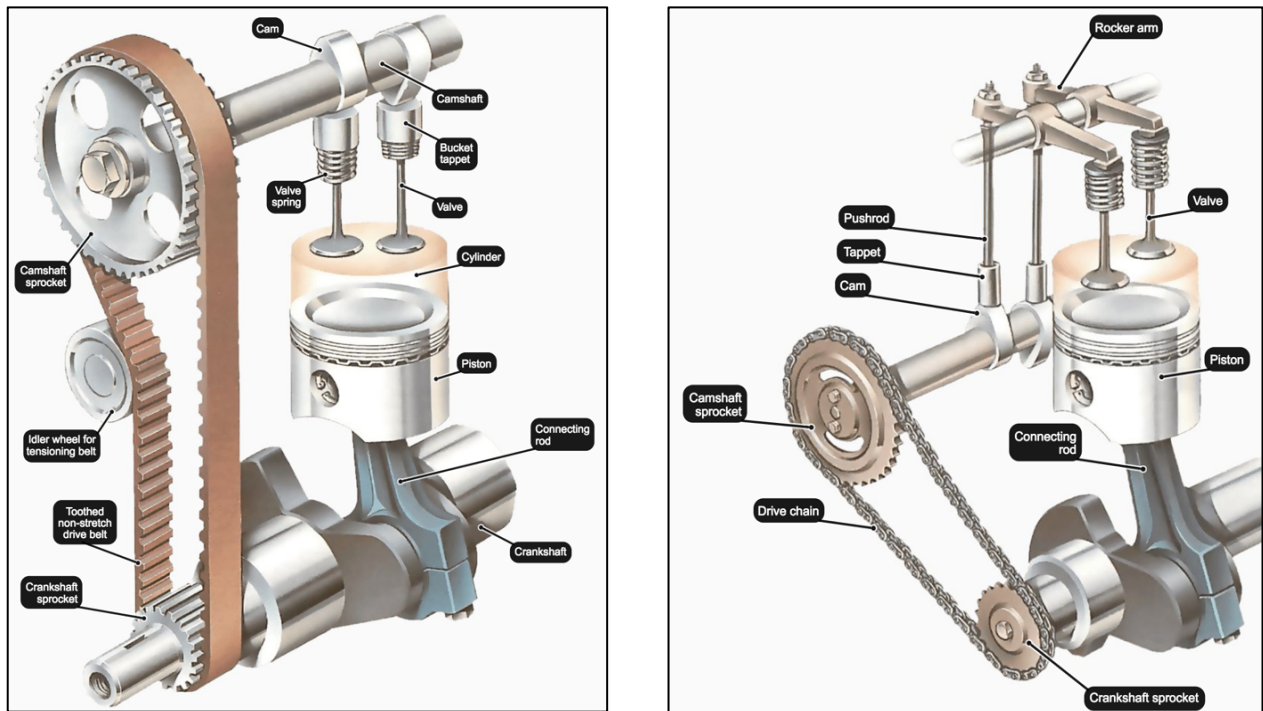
On the left, a crankshaft and camshaft with bucket tappets configuration and, on the right, a crankshaft and camshaft with pushrods and rocker arms configuration [8]
